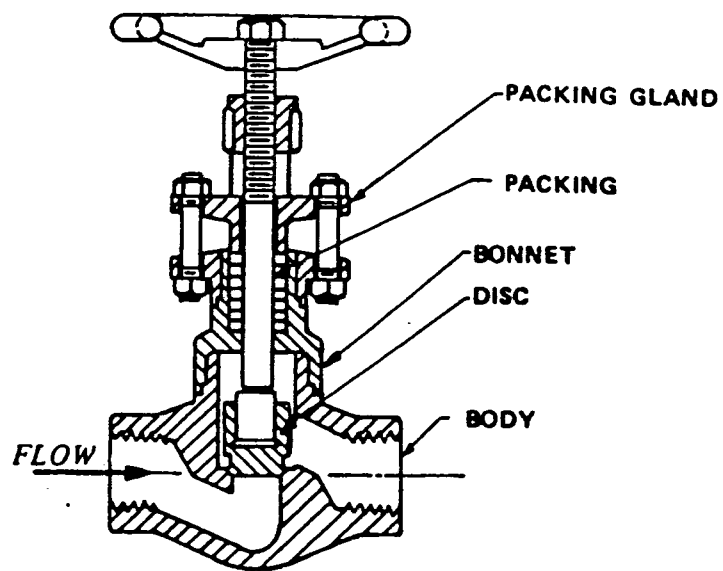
SINGLE PORT GLOBE VALVE
